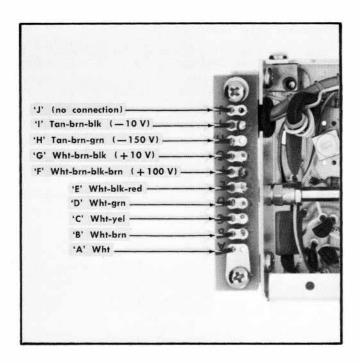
Wiring color code to phase lock assembly pin connectors.
